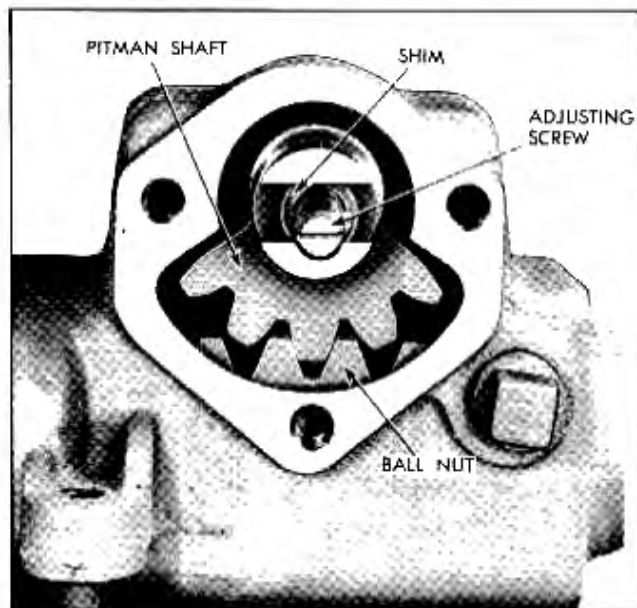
Positioning Pitman Shaft and Ball Nut
